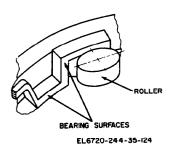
Distance setting gauge 10-meter bearing Surfaces.
